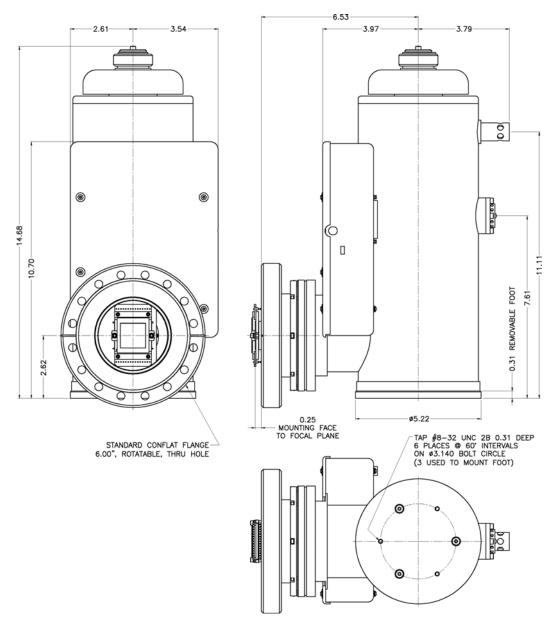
PI-SX LN-Cooled Camera (6.00" ConFlat Flange)
